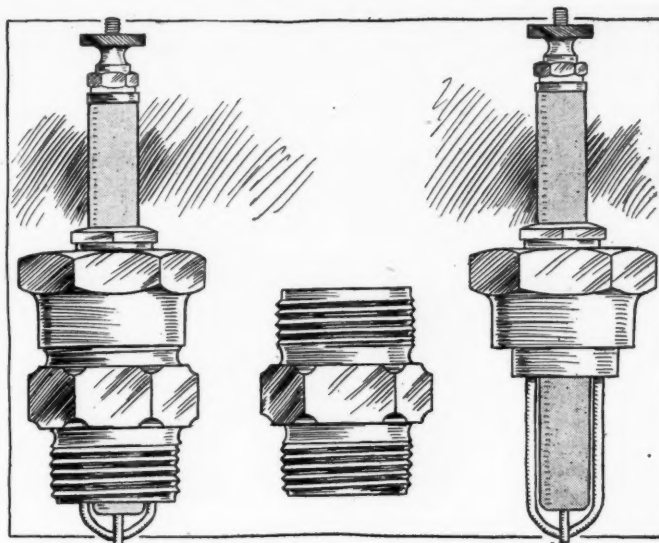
Assembly of the Hartford heavy-duty spark plug
